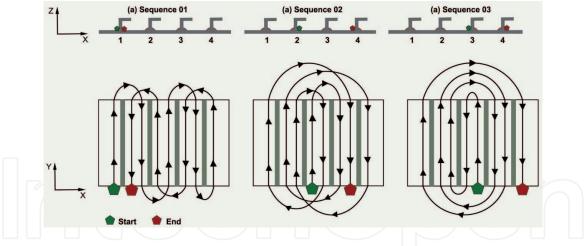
Examples of welding sequences and directions in the union of hardened panels.
